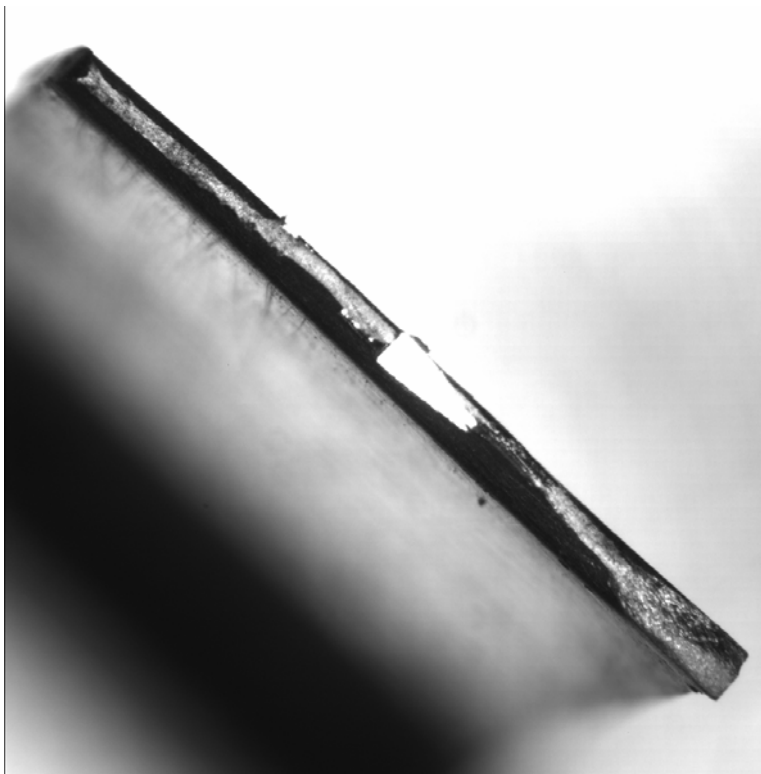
Fracture Surface of Specimen 5708.
